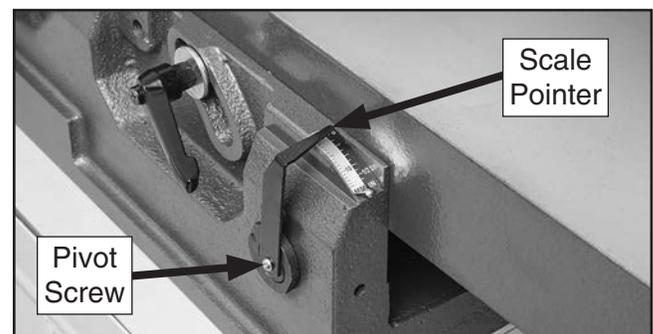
Depth-of-cut scale pointer adjusted to "0".
